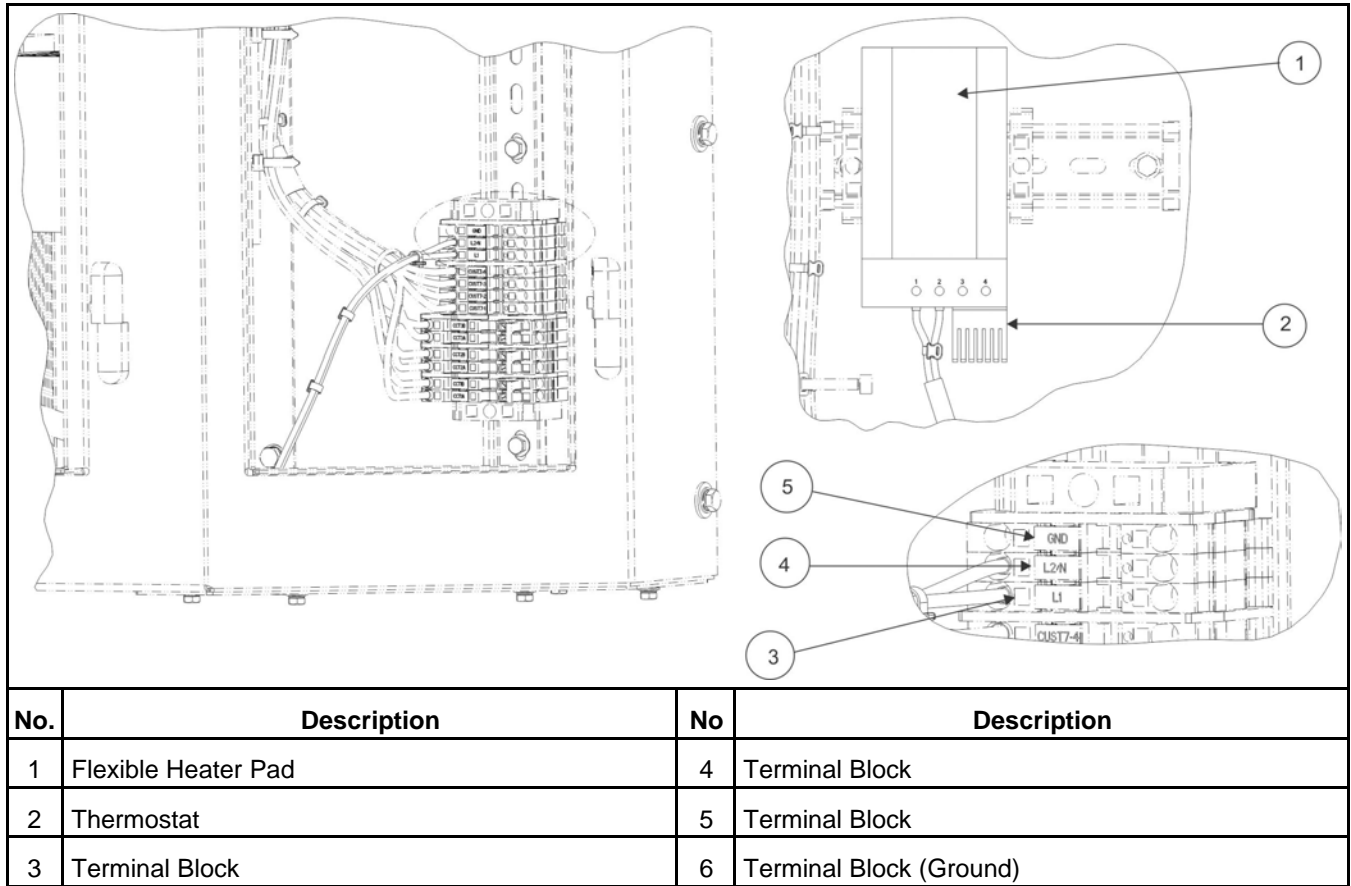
TYPICAL CONTROL CABINET HEATER
